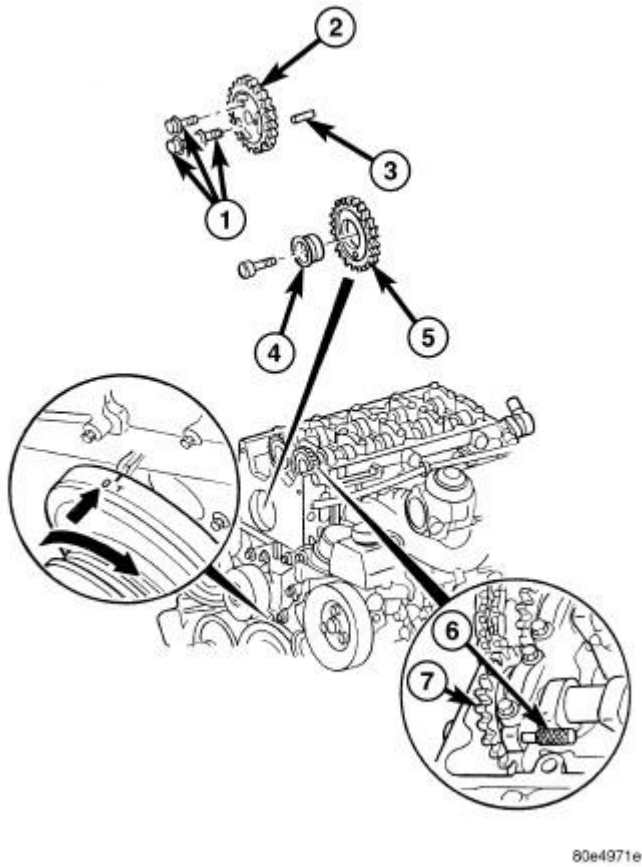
Special Tool 8929-Camshaft Locking Pin
